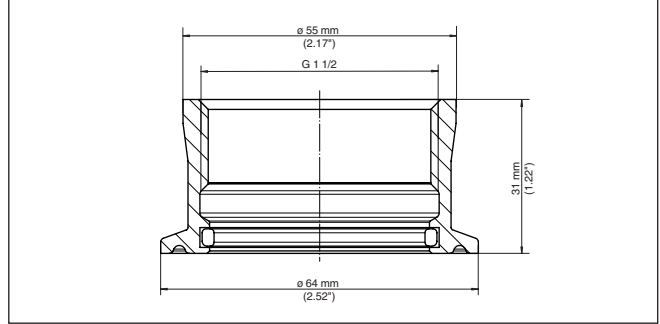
Dimensions of threaded adapter G1½ (DIN 3852-X) on Clamp 2" (DIN 32676, ISO 2852) PN 16
